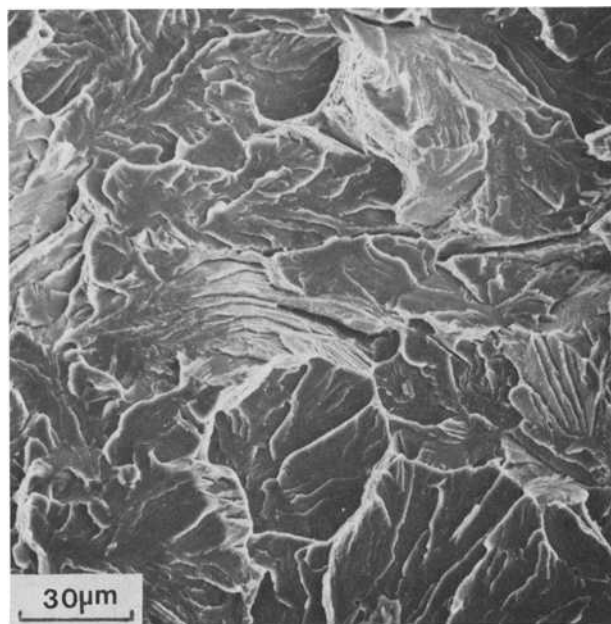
Scanning electron fractograph of rail steel fractured at -45°C .
